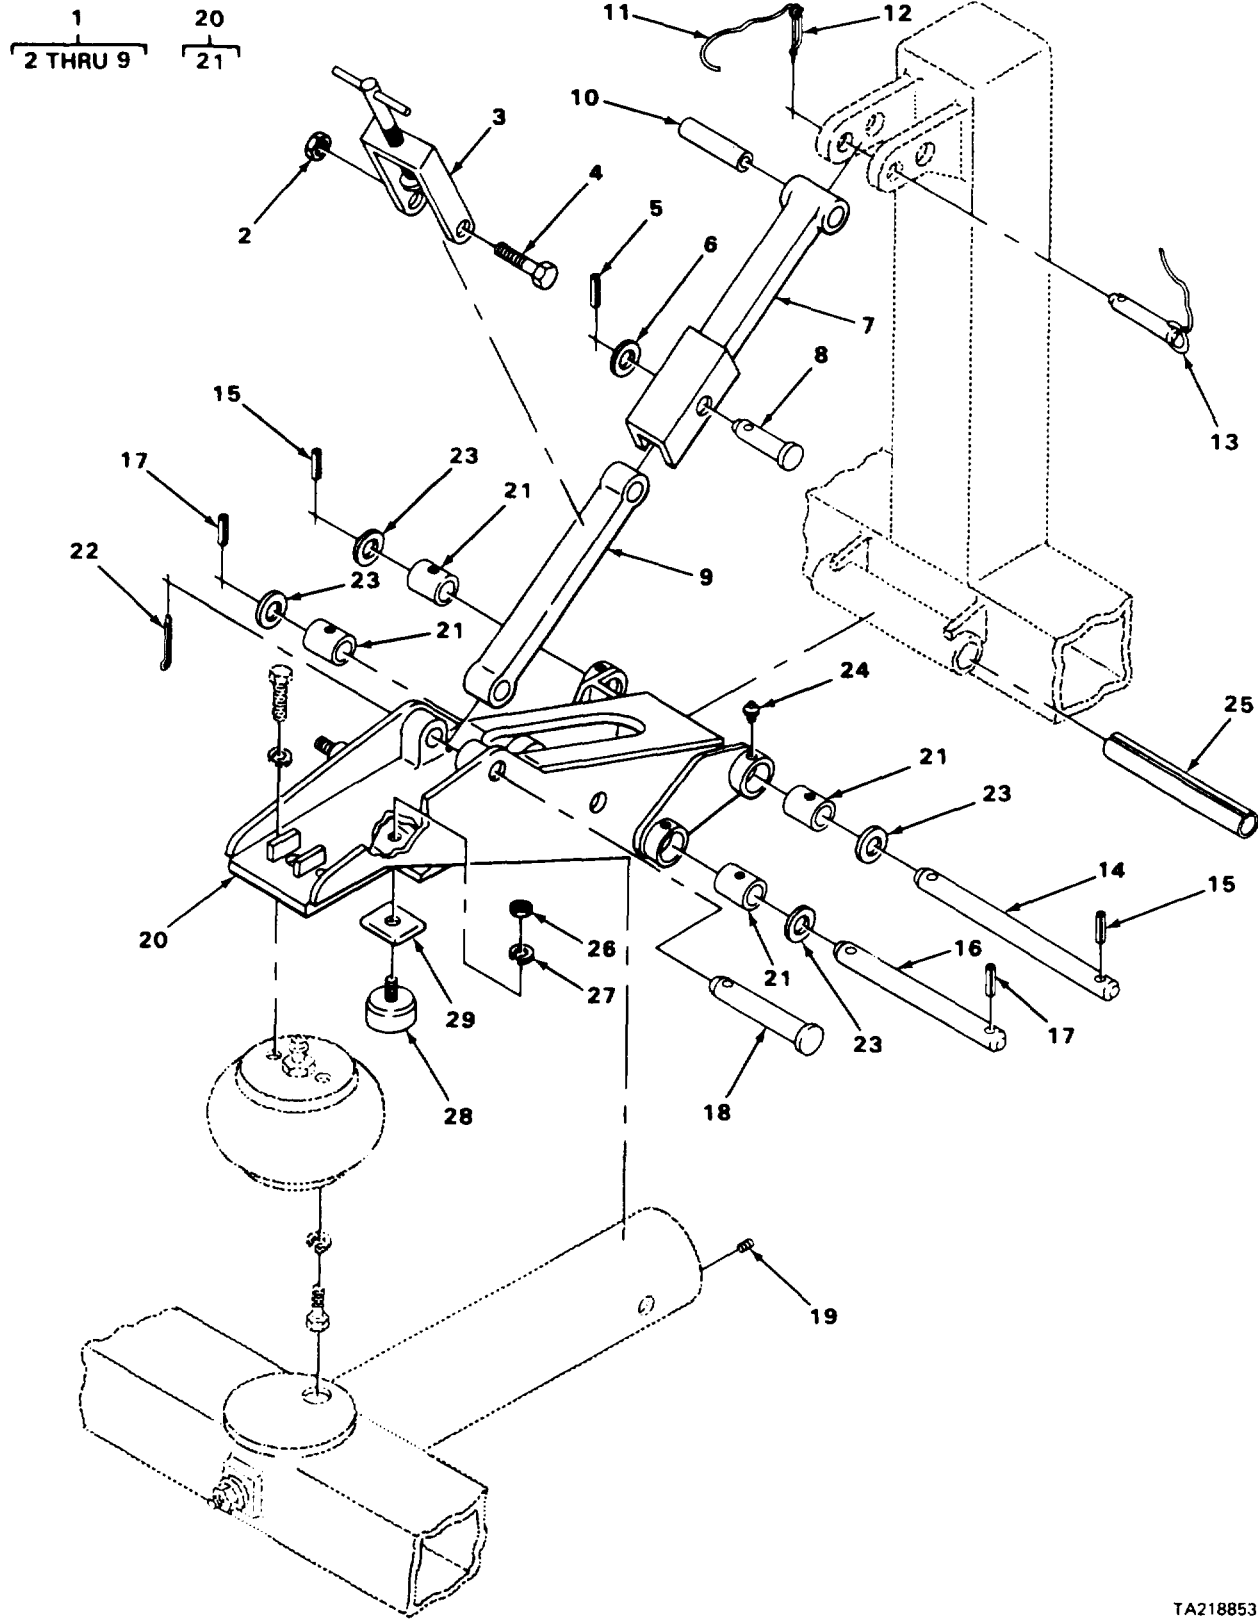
STEERING ARM AND TIE ROD ASSEMBLY.
